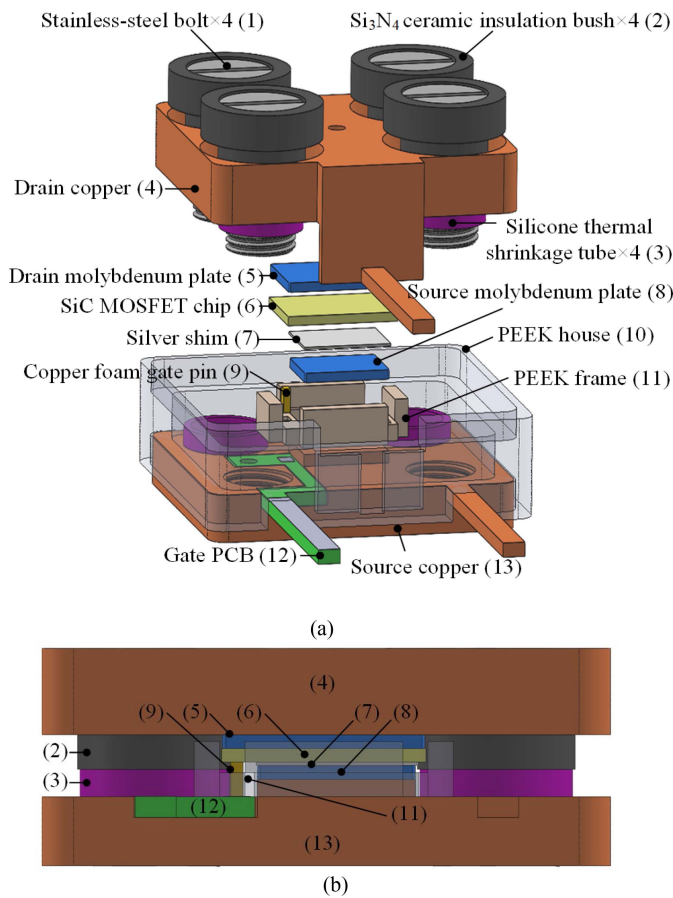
The structure of proposed double-sided cooling PP SiC MOSFET. (a) Explosion view. (b) Perspective view from the front.
